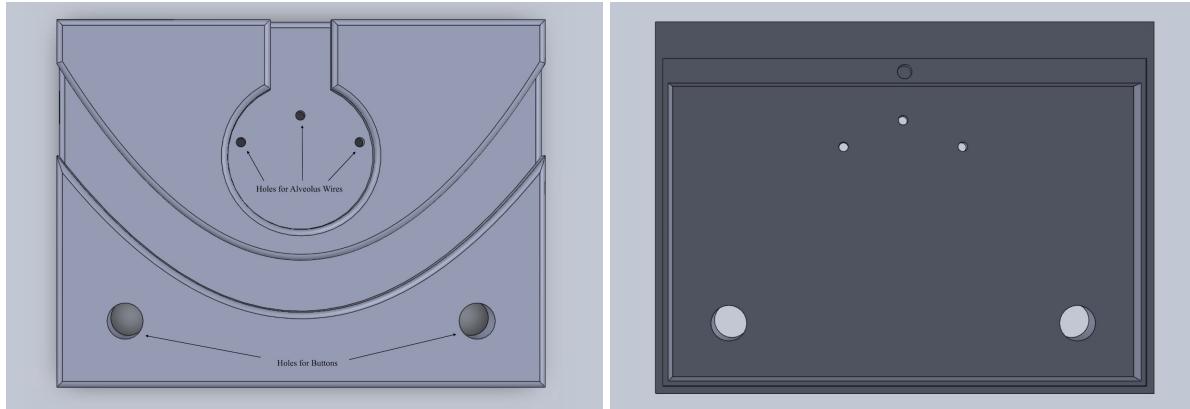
CAD drawing incorporating holes for wires and buttons as well as a compartment in the back for storage.
